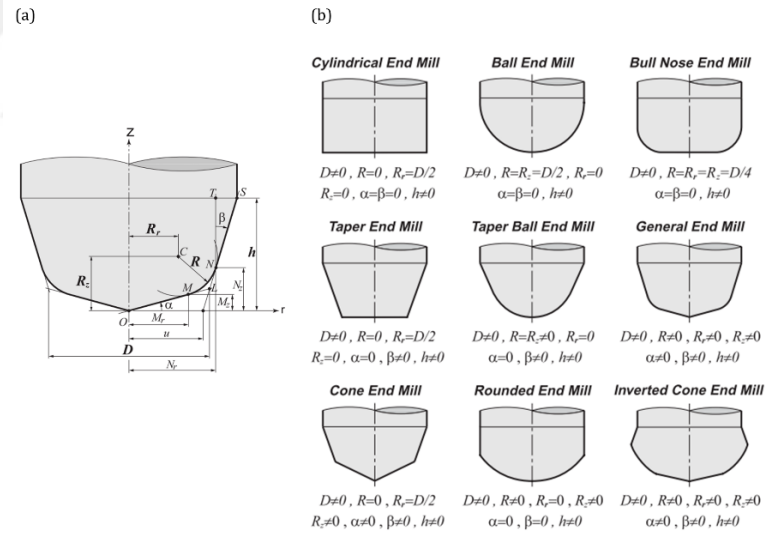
Helical milling cutter geometries, (a) General tool geometry, (b) End mill shapes [41]
